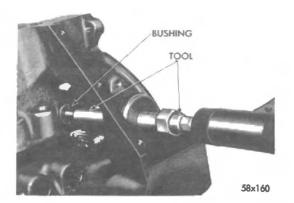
Installing Distributor Drive Shaft Bushing Using Tool CA-3053
